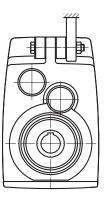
Mounting the rubber buffer (Option G or VG) on parallel shaft gear units
